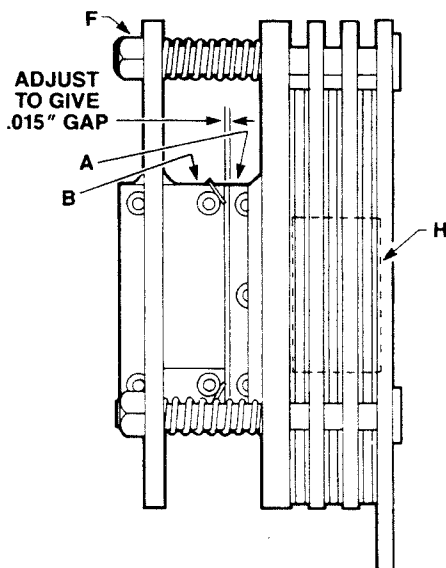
MOTOR BRAKE ADJUSTMENT
